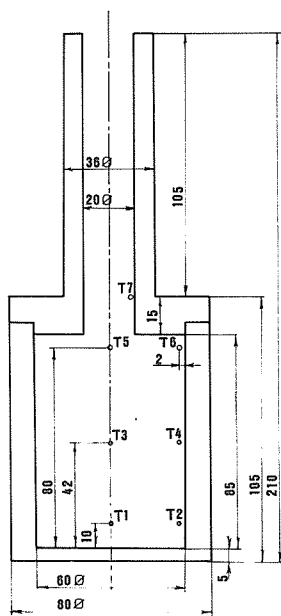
Dimensions of graphite mold used for the measurement of feeder head level in unidirectional solidification experiments. Points T1 to T7 indicate the positions of the thermocouples. (unit-mm)
